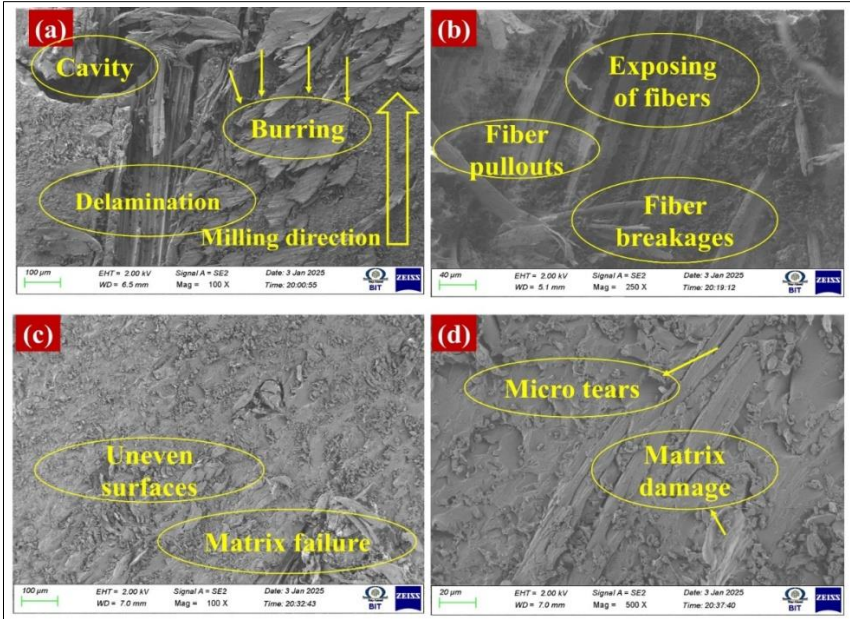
FESEM images of the machined surface of FFRE composites milled under the test conditions: (a, b) feed rate of 70 mm/min, end mill cutter size of 10 mm, spindle speed of 900 rpm; (c, d) feed rate of 70 mm/min, end mill cutter size of 6 mm and spindle speed of 900 rpm
